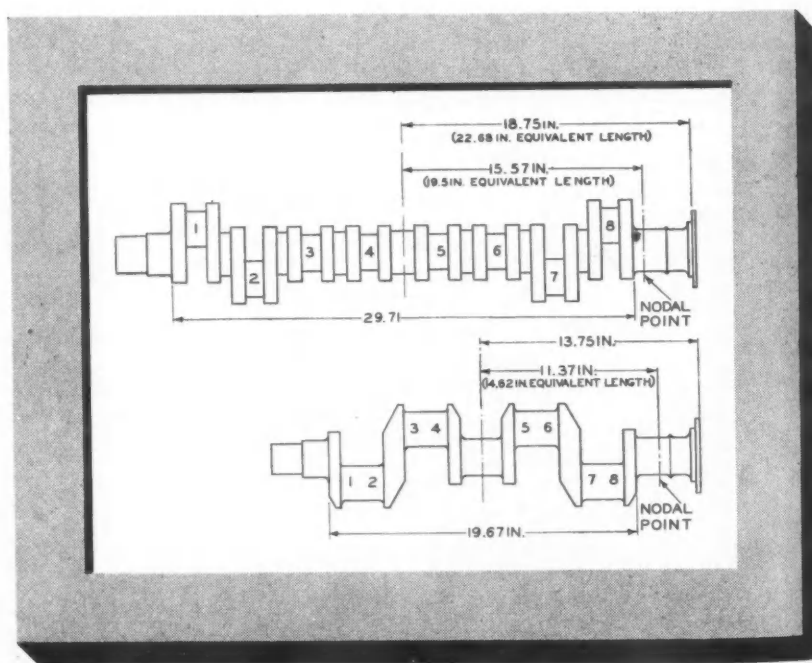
Layouts of crankshafts for eight-in-line and V-eight engines of the same bore and stroke
